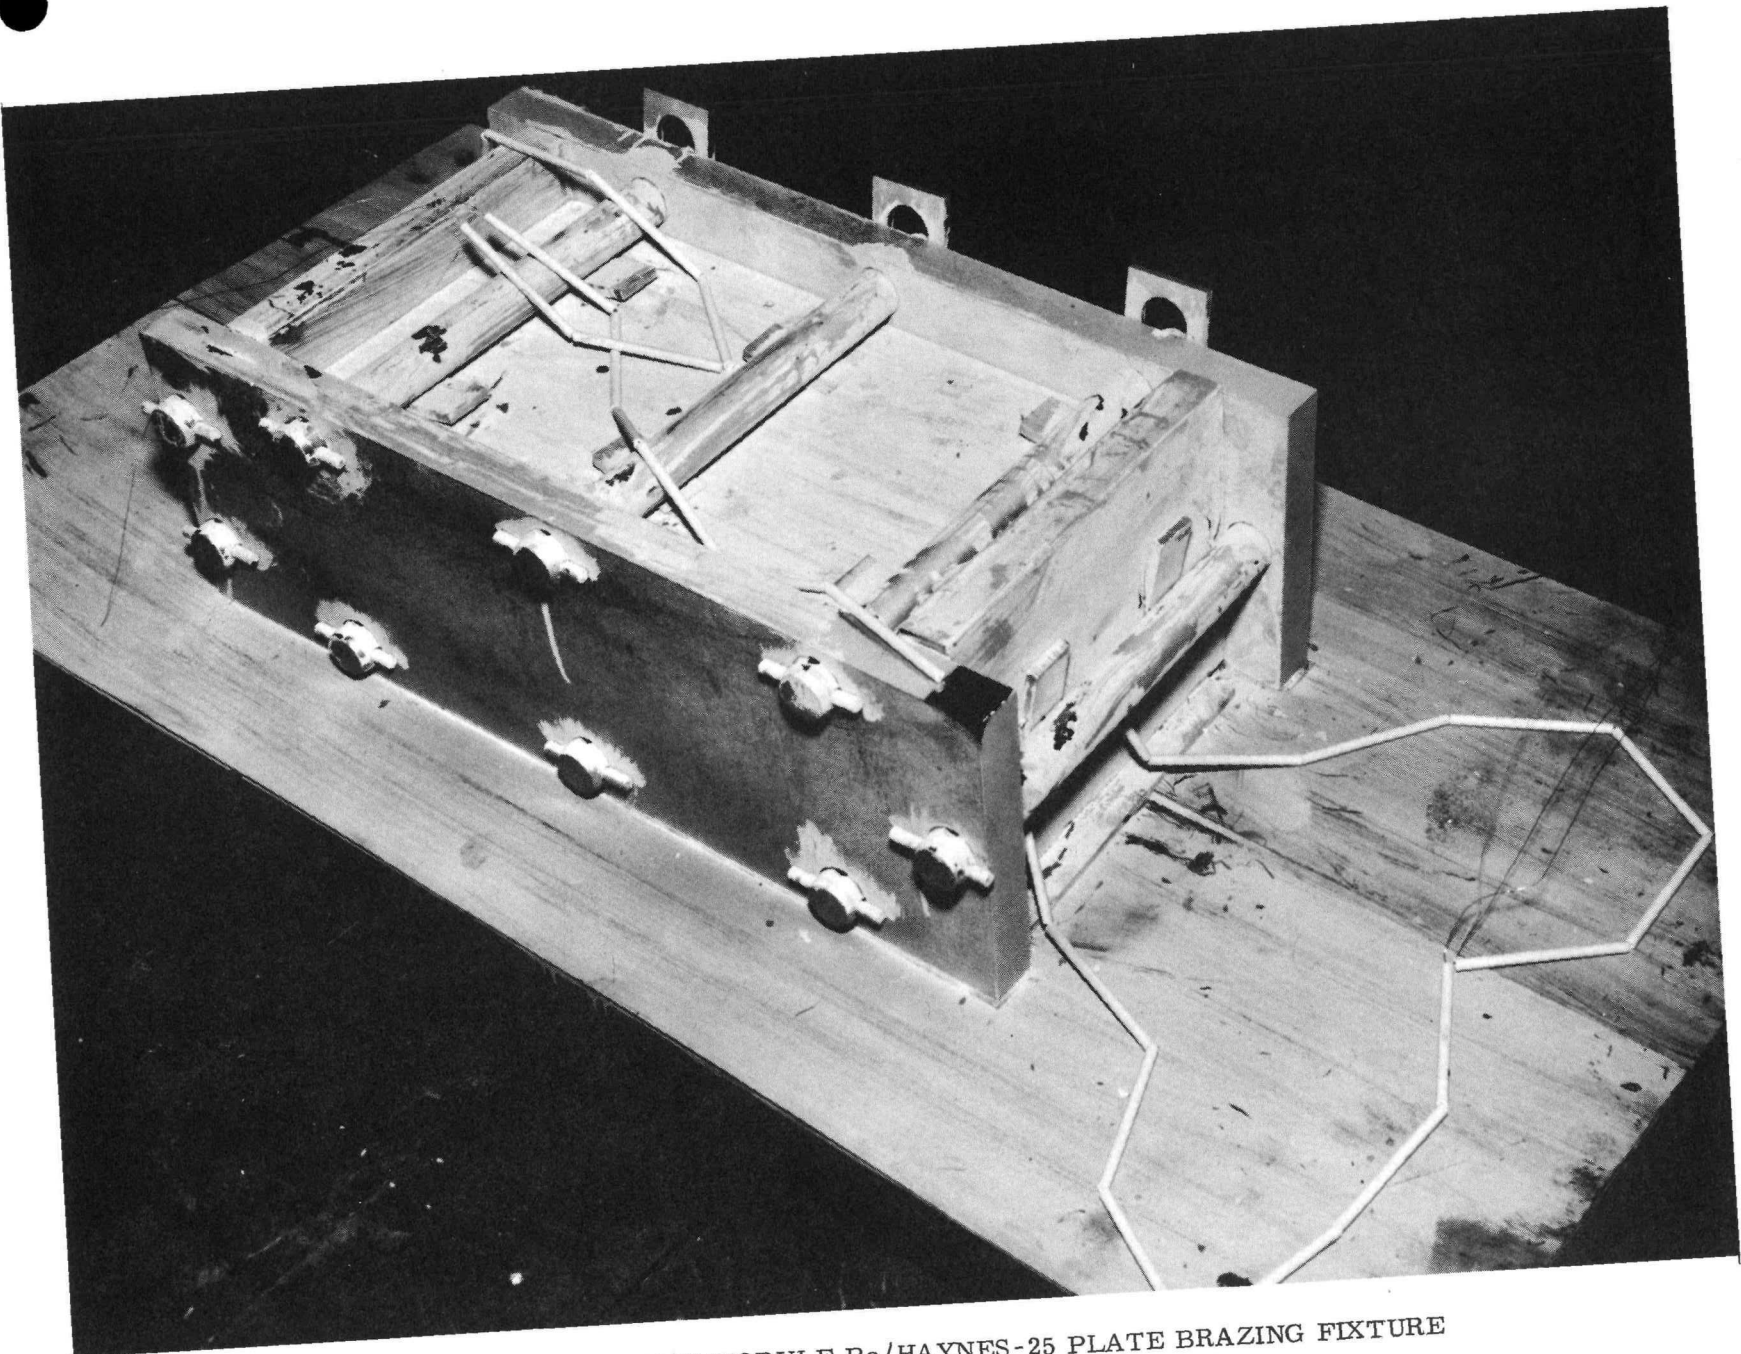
T/E MODULE Be/HAYNES-25 PLATE BRAZING FIXTURE
